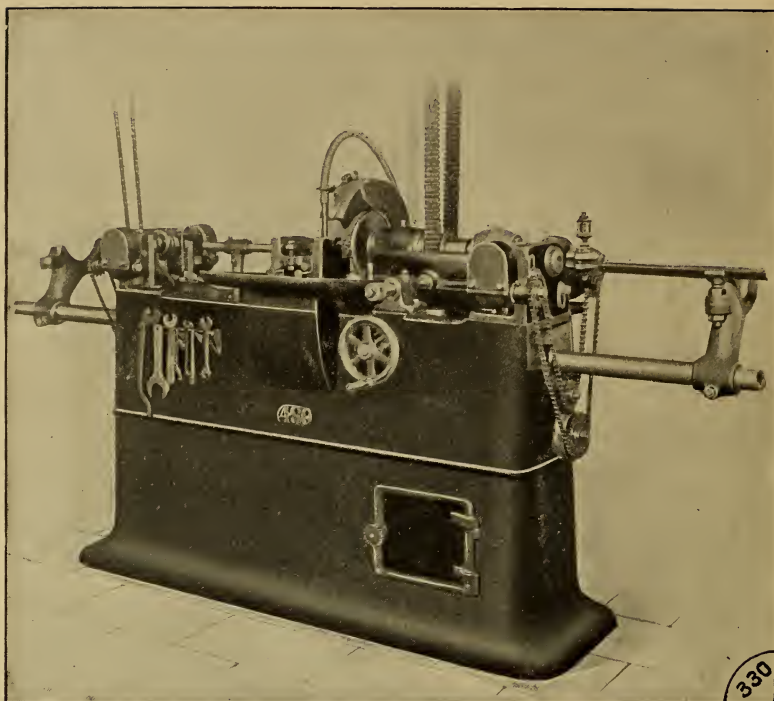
RENOLD CHAINS DRIVING GRINDING MACHINE
